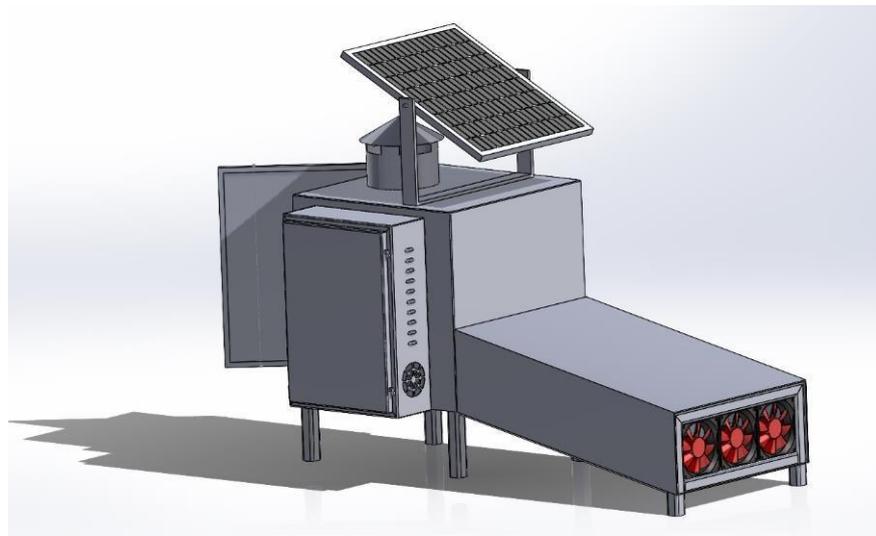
Prototype Design of Solar-Powered Seaweed Drying Machine
